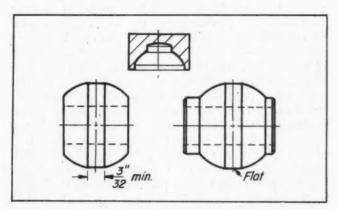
An approximate design for spherical surfaces permits simplified tooling and extends tool life considerably
